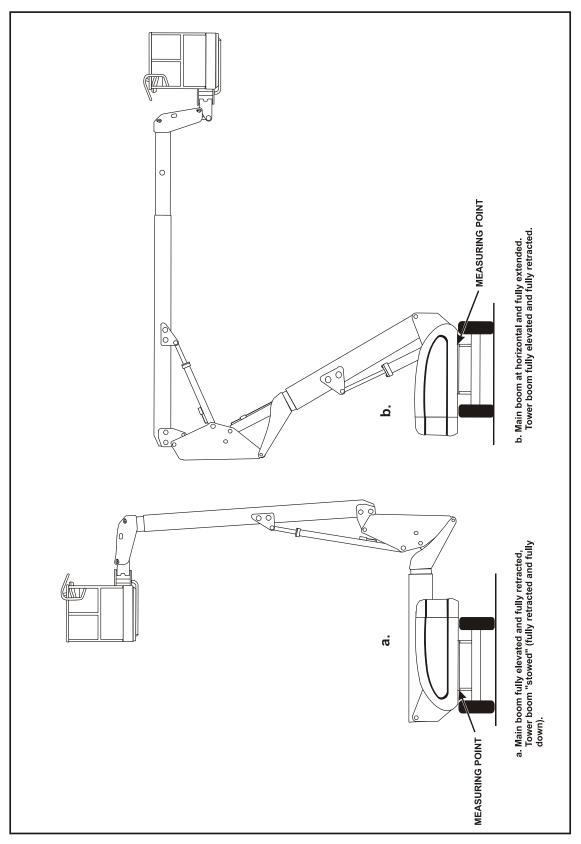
Swing Bearing Bolt Feeler Gauge Check
